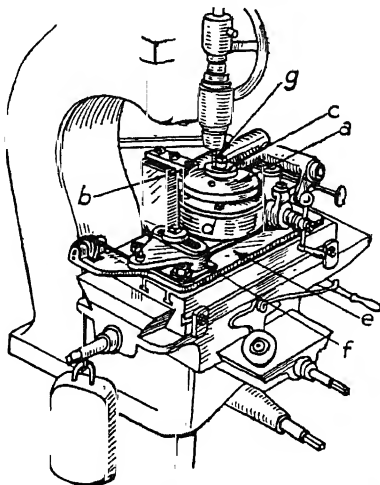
Correct milling fixture for producing cams operating swinging levers: a, template (open cam); b, tracer roller, mounted on fixed bracket; c, cam to be machined; d, circular table mounted on swinging lever; e, base plate of fixture mounted on machine table; f, fulcrum (adjustable) of circular table; g, milling cutter (end mill).
